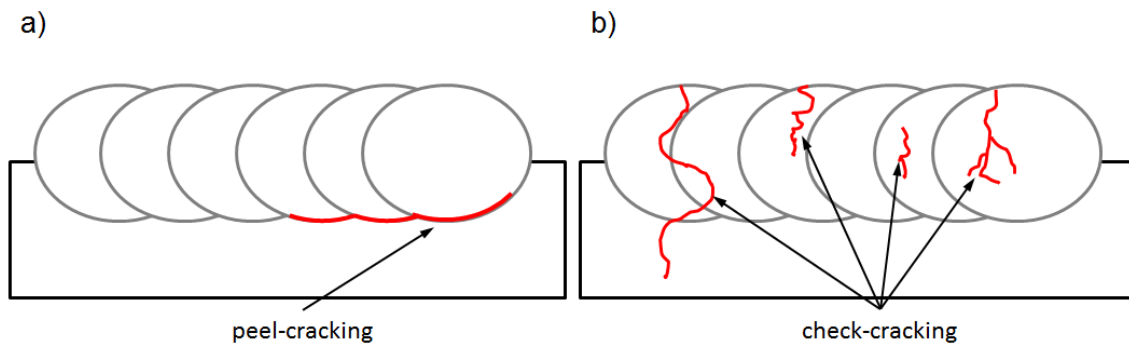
Sketch of two common found types of cracking in cladding layers; a) peel-cracking is along the boundary of the layer and the HAZ; b) check-cracking, cracks are vertically in the layer, sometimes into the HAZ
